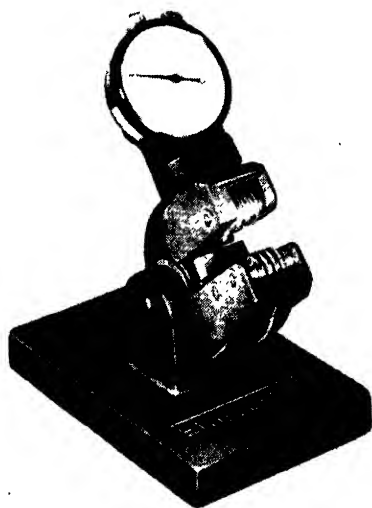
12. The Thredchek, a dial indicator roll-thread snap gage. (Courtesy of The Sheffield Corporation.)
